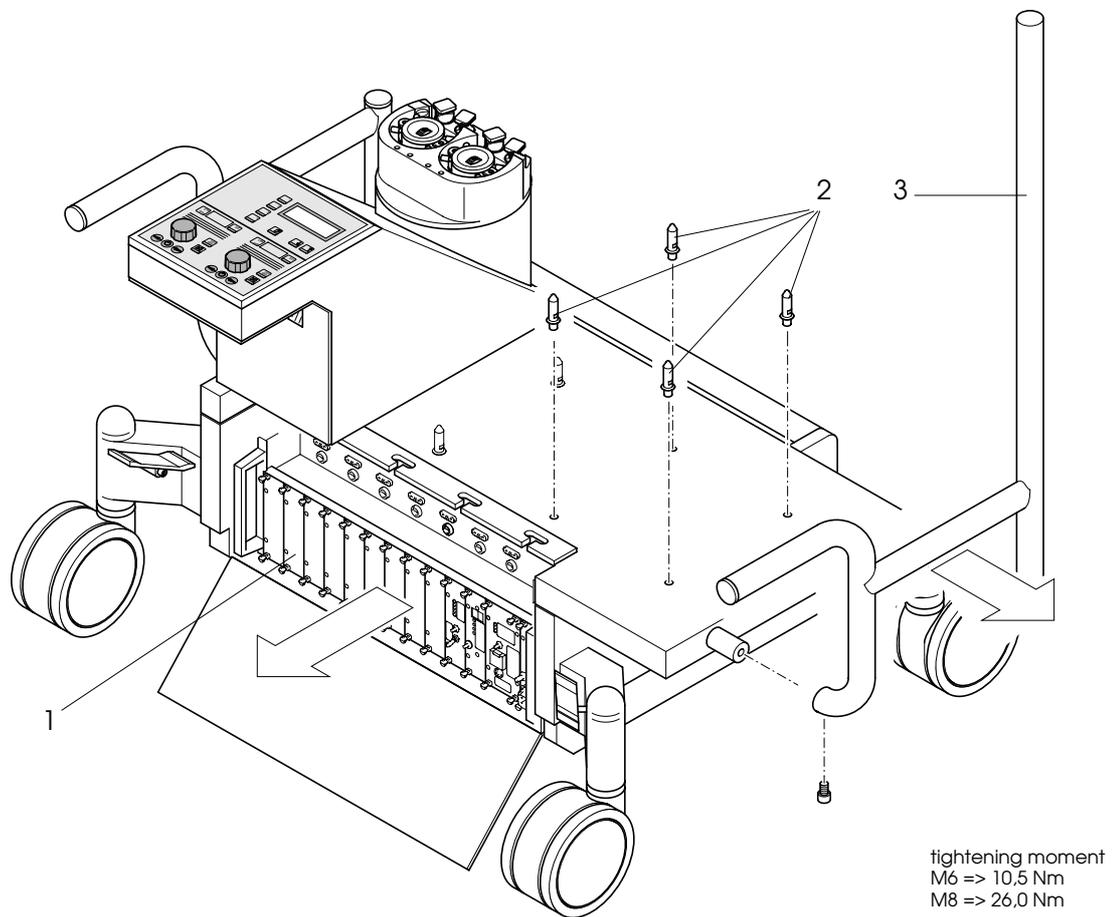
Double Head Pump, mast-mounted: Preparing console for installation
